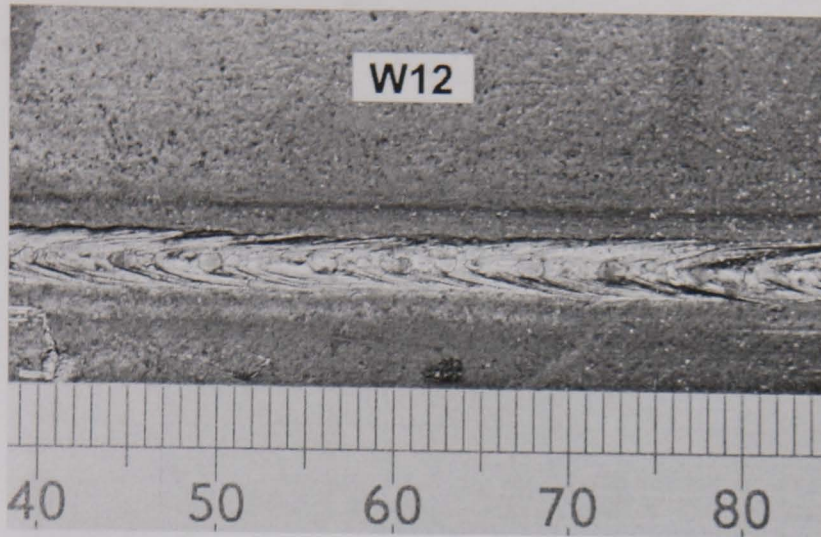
Nd:YAG laser weld made on a sample with ground U preparation and 9.0mm root face. The sample was welded with 8.2kW power at the workpiece, 1.0m/min welding speed, -4.0mm focus position. This shows the effect of increasing joint gap and deterioration starts at approximately 0.25mm gap.
